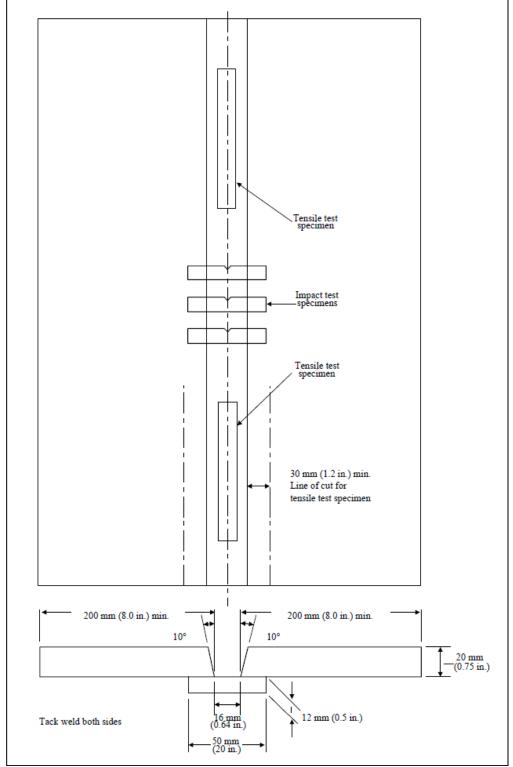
Deposited-Metal Test Assembly for Submerged Arc Welding – Multi-run Technique and Automatic Gas-Metal Arc Welding
